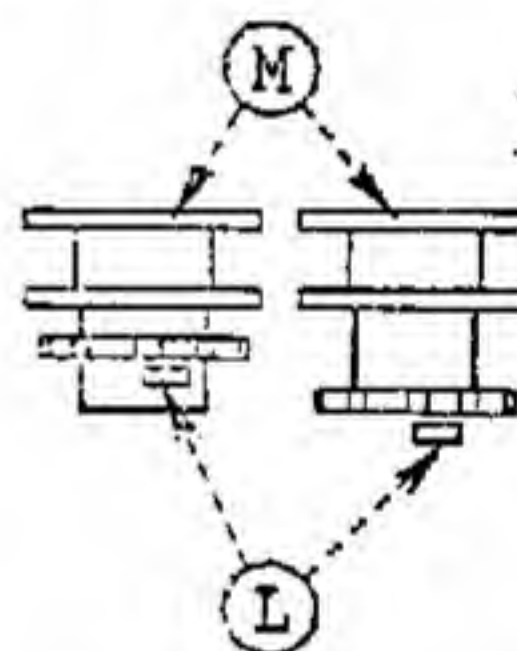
Check Transfer Teeth L on the Actuators. Adjust so they are close to Transfer Gears M.
